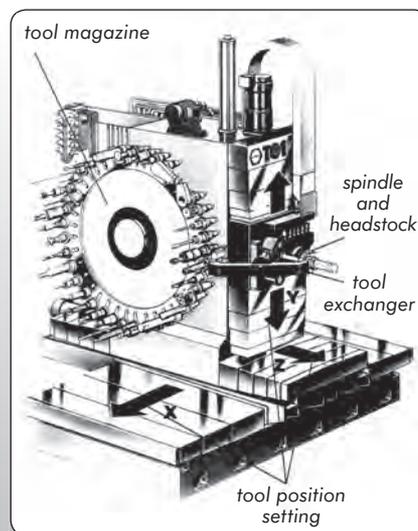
Main parts of the numerically controlled machine tool [INA]
